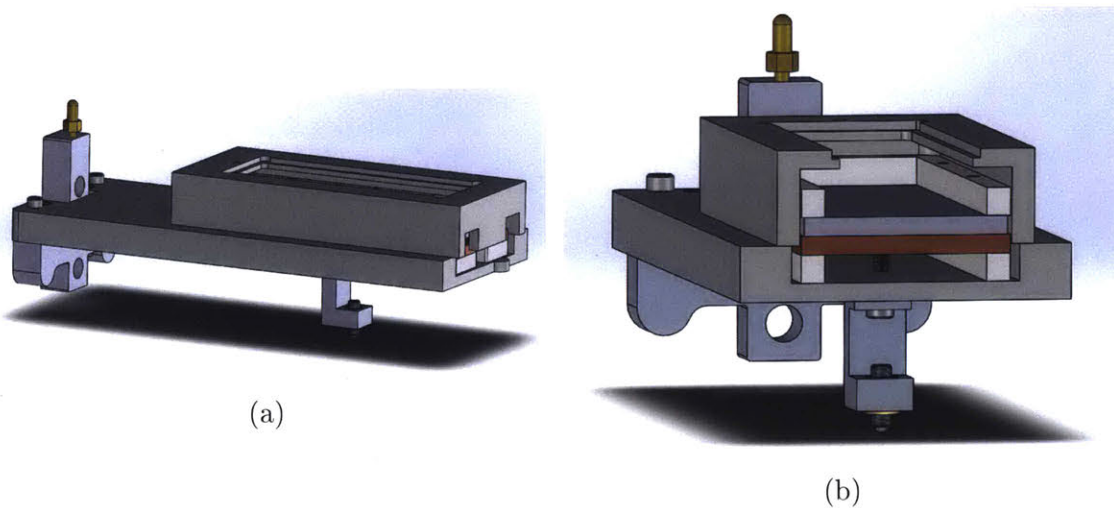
Model of the single-layer build plate, and cross-section showing, in order, the base plate, bottom insulator, heat plate, sample, insulator, and microscope slide holder.
